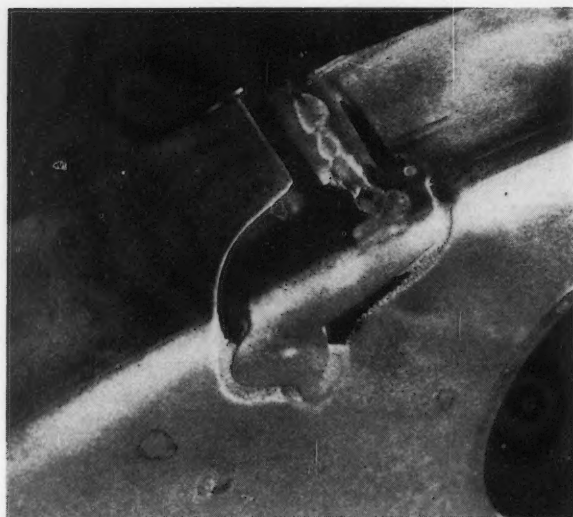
View from underside of tray No. 27 showing attack in heat affected zone where the weir was welded to the tray flange.
